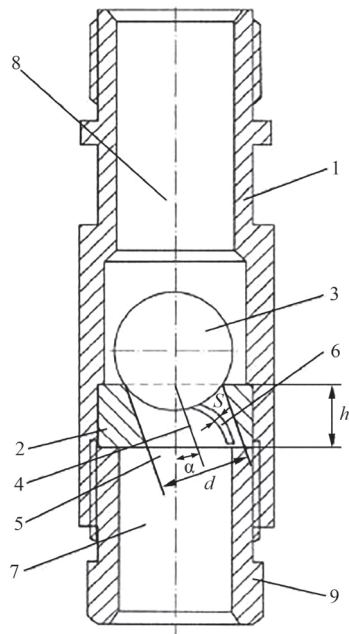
The ball valve of the modified design. 1—body; 2—seat; 3—ball; 4—shifted centreline of the central hole; 5—vertical axis of valve symmetry; 6—360° screw plate; 7—sub-valve cavity; 8—supra-valve cavity; 9—seat holder.
